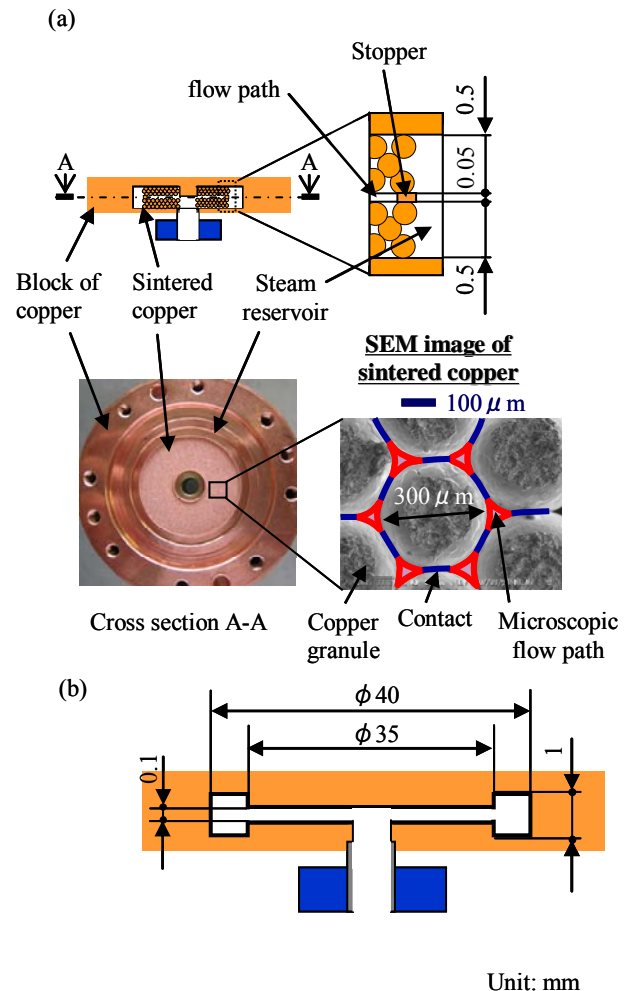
Structures of the (a) sintered-metal heating section and (b) hollow-tube heating section.
